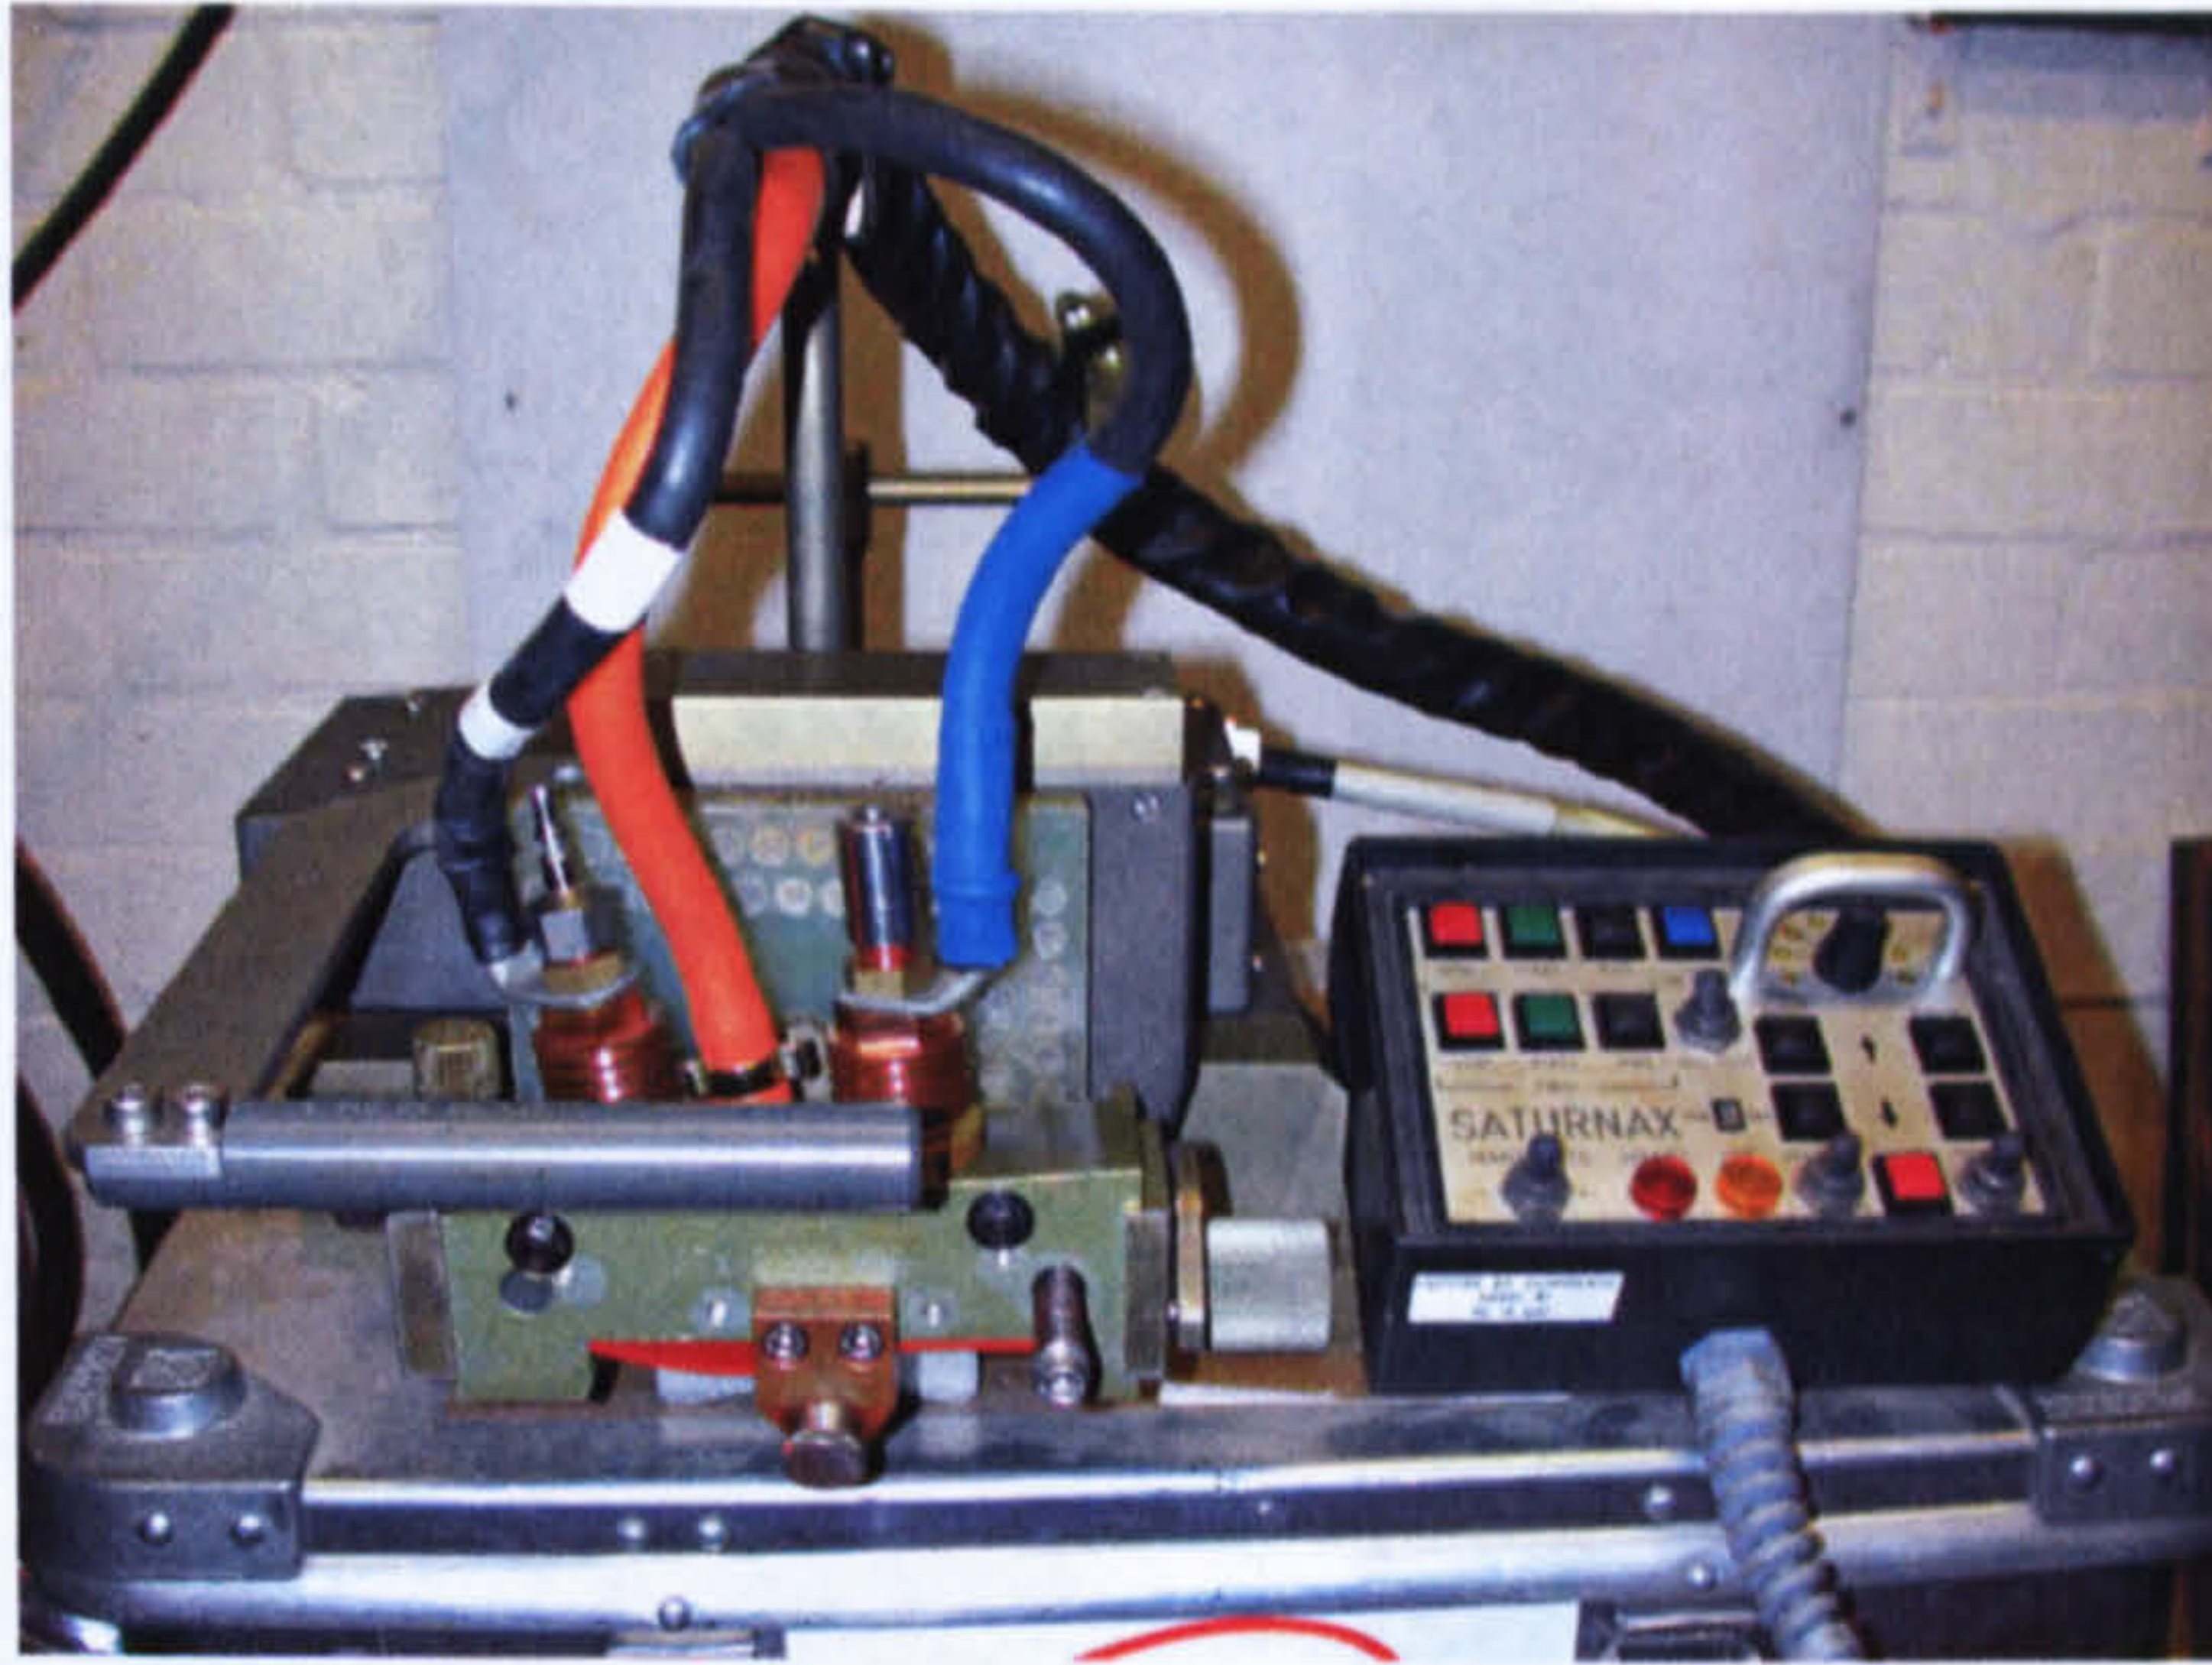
Serimer-Dasa's Saturnax 5 dual torch welding bug and controller
